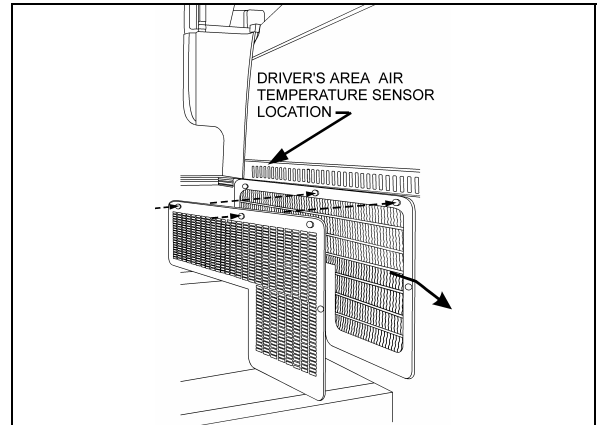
DRIVER'S SECTION ACCESS GRILL 22312
